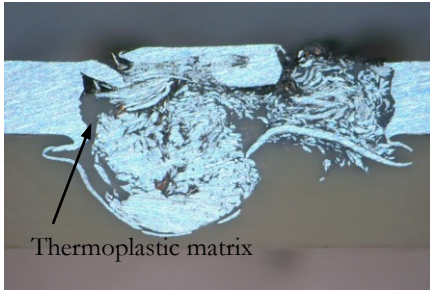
AA5754-PP joint cross section and fracture welded with 1500 rpm, 5 cm/min, 0.5°, CCW
